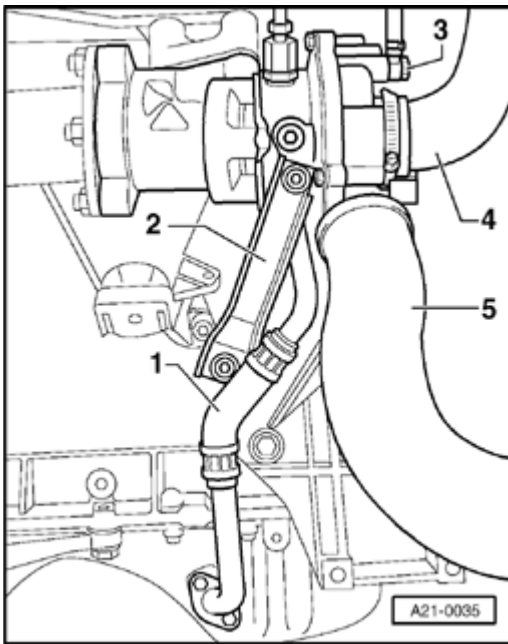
Identifying Turbocharger Bracket, Oil Return Line, Air Hoses & Banjo Bolt
